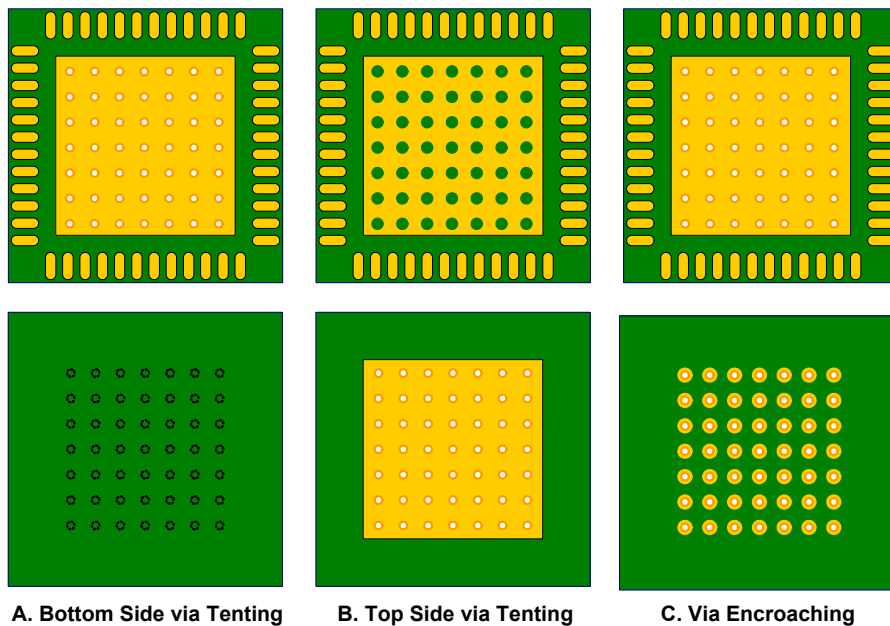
Techniques to Prevent Solder Wicking (Top and Bottom Vias of Thermal Array Shown)
